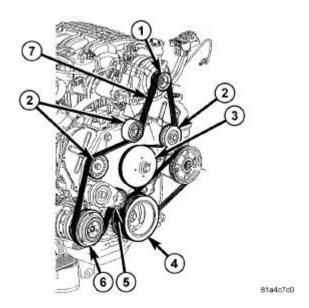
Accessory Drive Belt Routing - 4.0L Courtesy of CHRYSLER LLC
